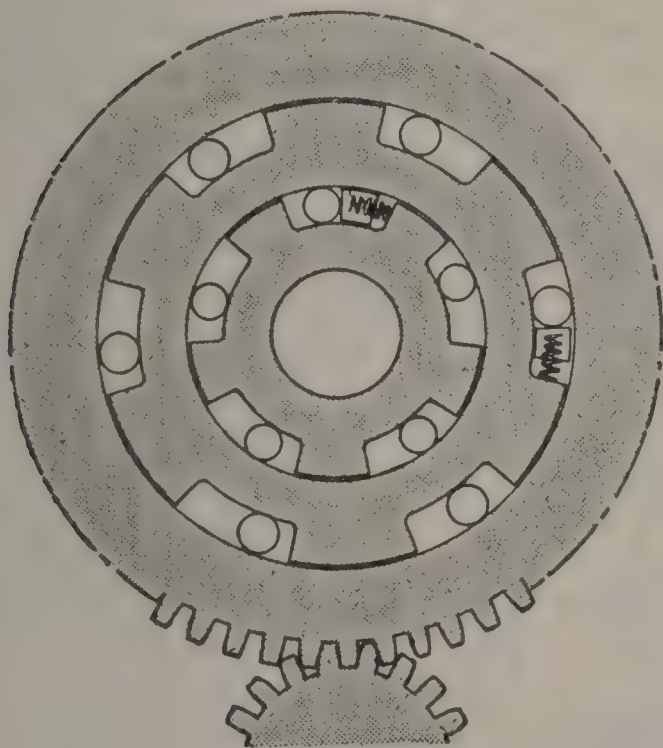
The double overrunning roller type clutch used by the Northeast company
